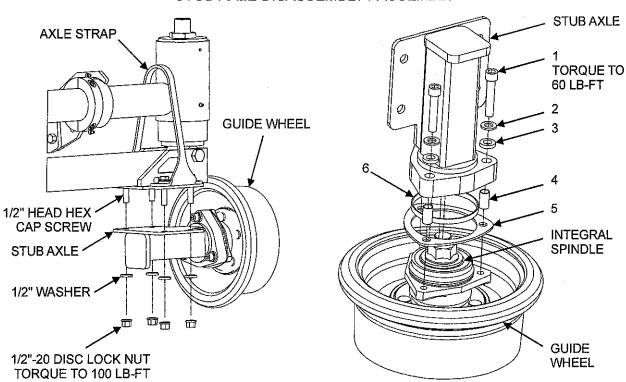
STUB AXLE DISASSEMBLY / ASSEMBLY
